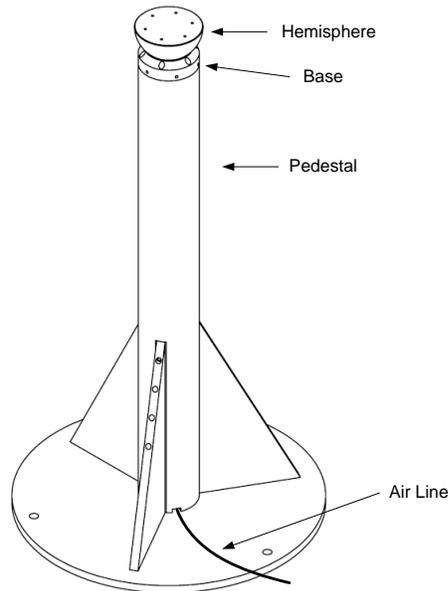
Spherical Air Bearing and Pedestal Assembly
